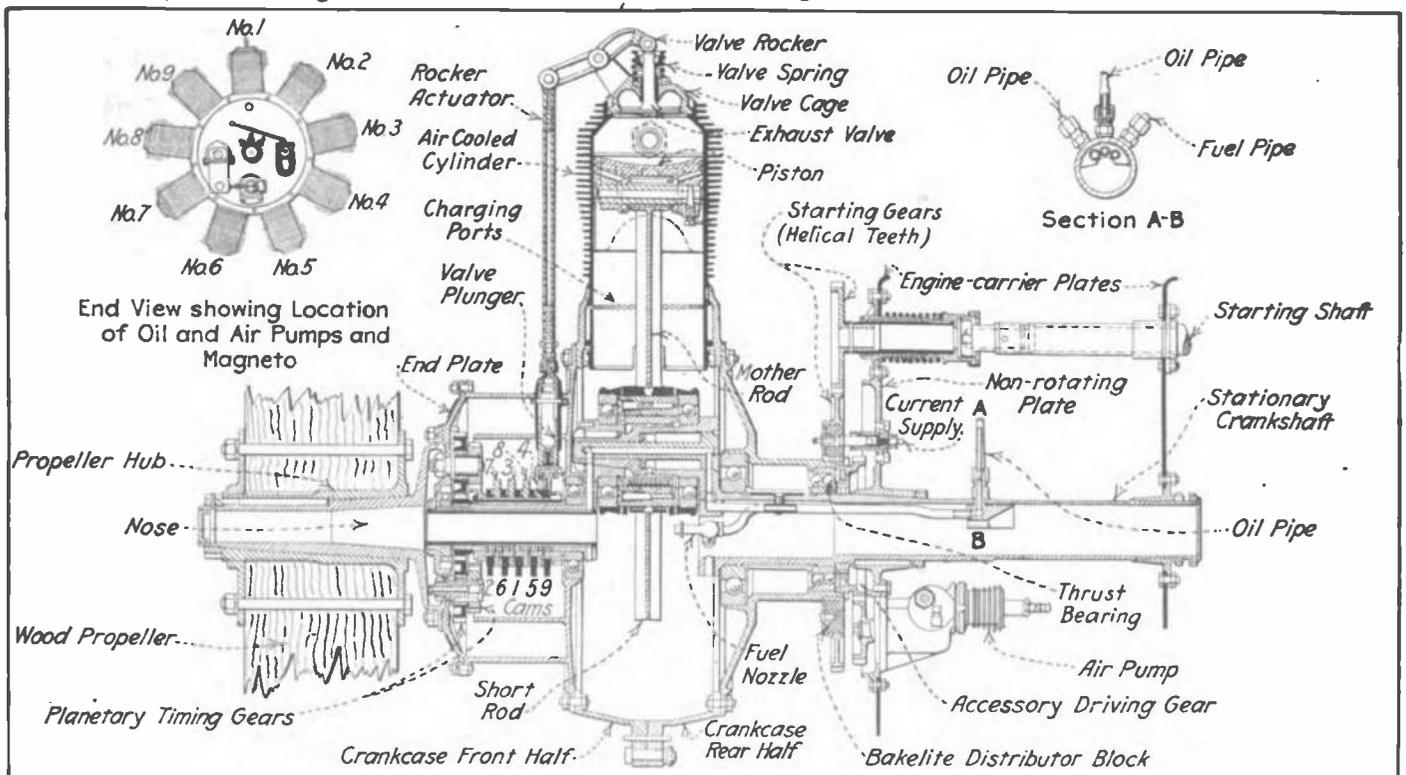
Sectional view showing construction of American built Monosoupe Gnome engine
